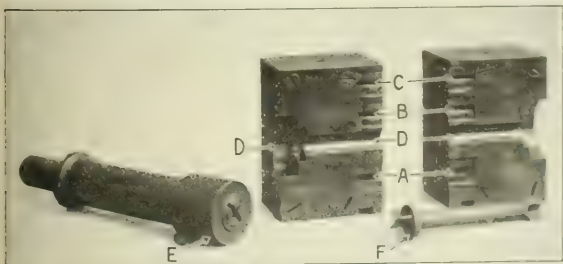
Dies and Formers for Forging Air Pump Valve.
